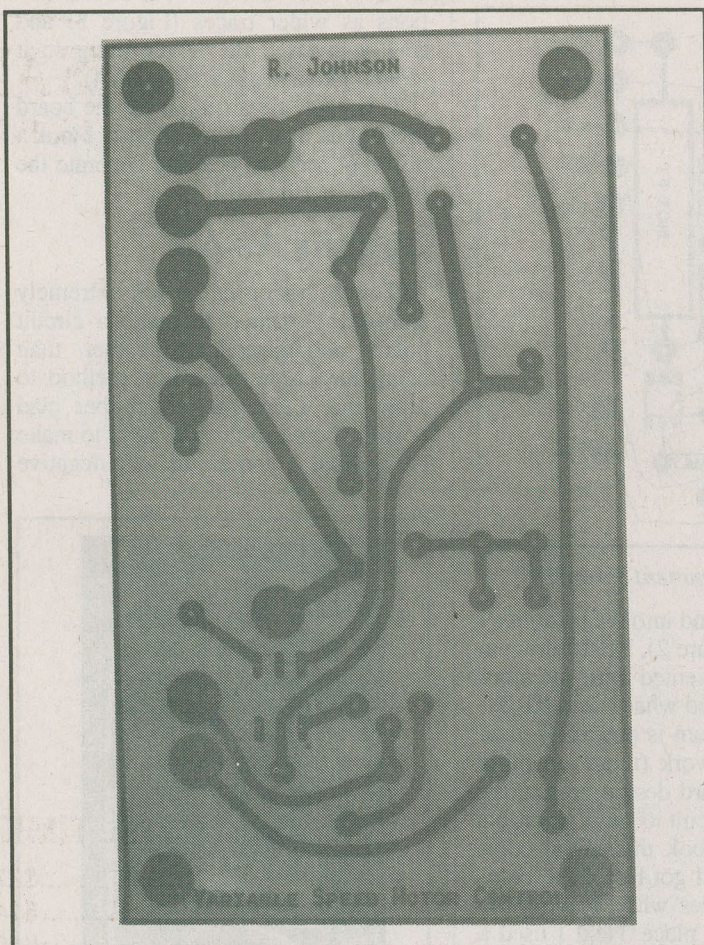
PC Board layout using Pads & Tape. (This layout contains a mistake. The second and third pads at top left should be connected instead of third & fourth).
